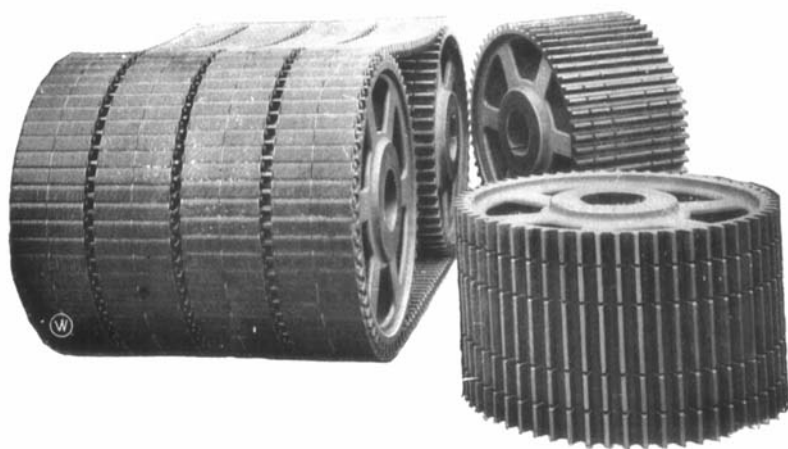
Three 500 H.P. Westinghouse-Morse Silent Rocker-Joint Chain Drives. Wheels, 59 teeth; Diameter, 37.8 in.; Two Chains 2 in. Pitch, 10 in. wide per Drive.
